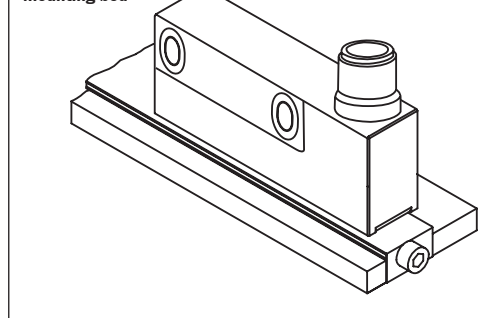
Magnetic tape screwed to the top of the mounting bed
